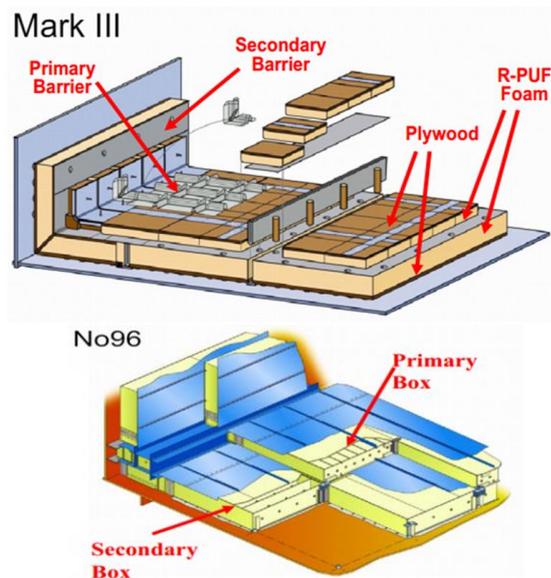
Schematic Drawings of Containment Systems: MARK III and GTT No. 96
